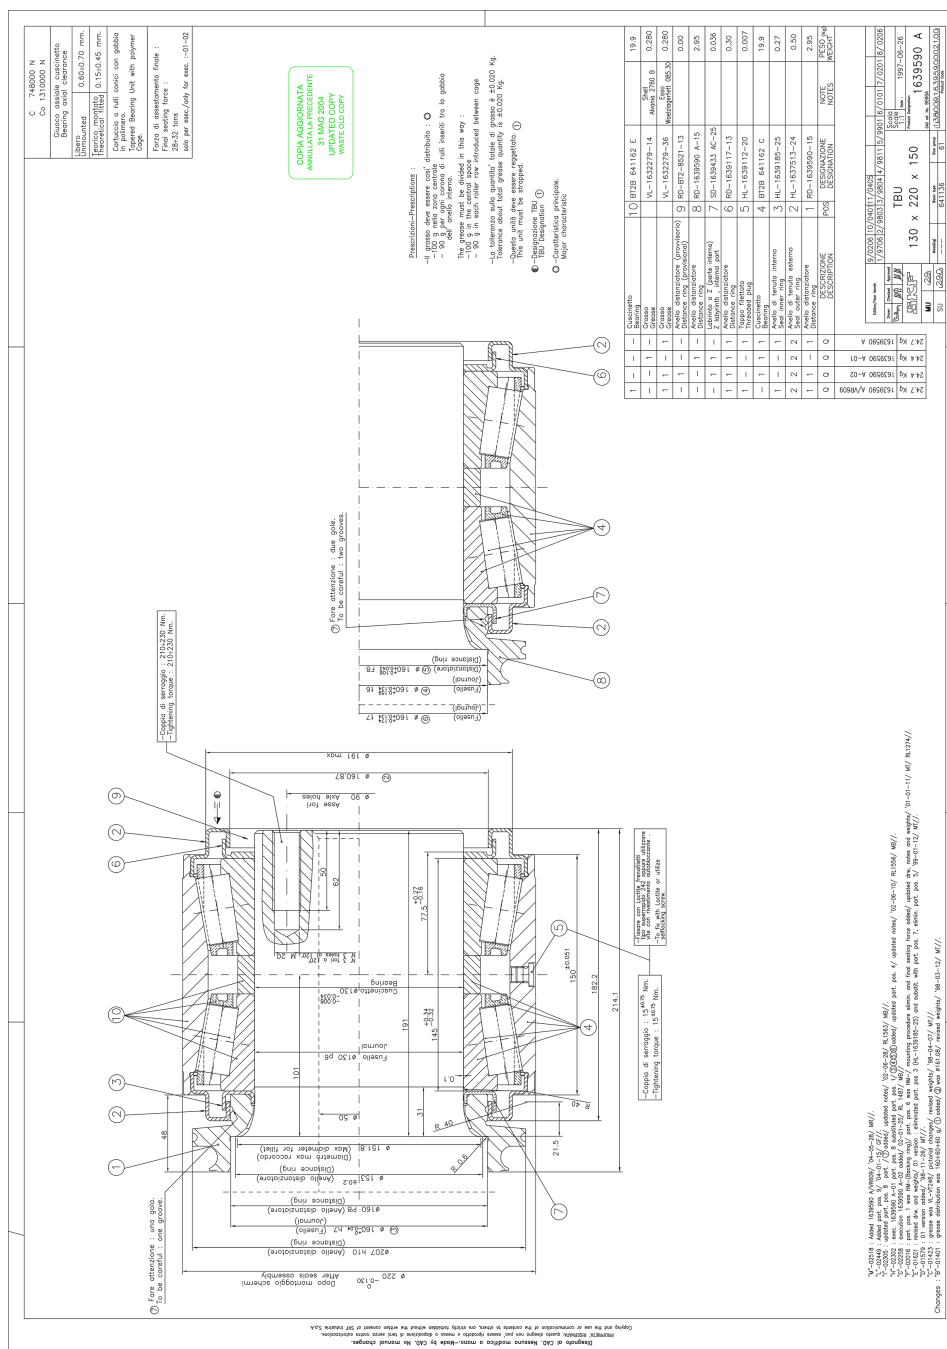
Technical drawing of the *TBU 1639590 A* bearing.
